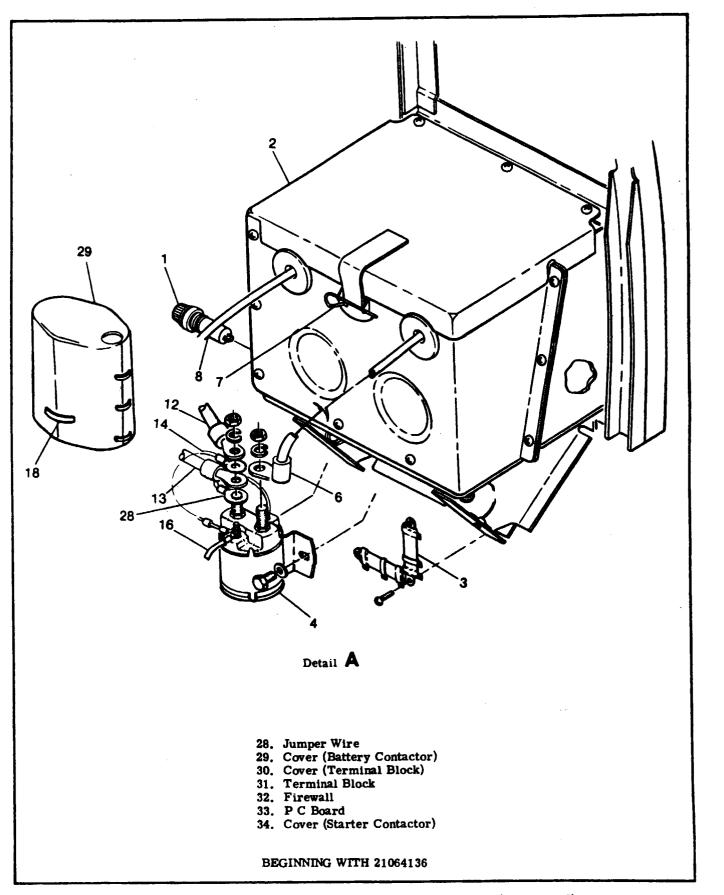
Battery and Electrical Equipment Installation (Sheet 4 of 5)
